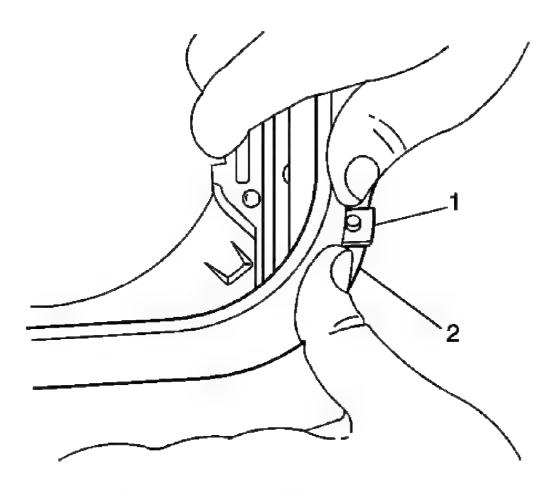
View of Lower Tab & Roof Opening Courtesy of GENERAL MOTORS CORP.
